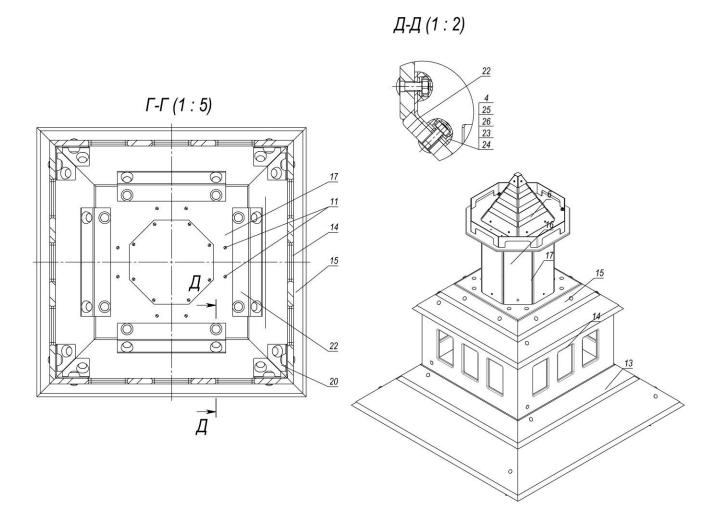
Fix a stepped roof on a tower with two platforms of 0.7-2 m and a 2 m tower
